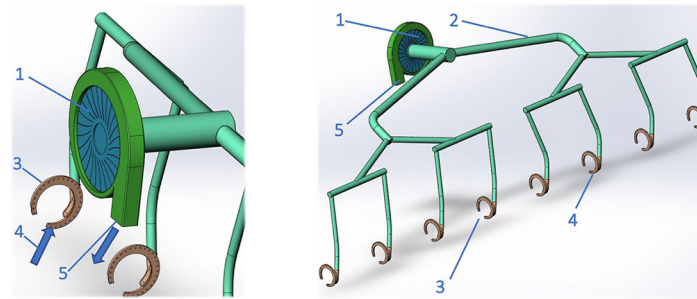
Design diagram of the pneumatic system of a precision seed drill with a centrifugal radial fan: 1 – fan; 2 – tree of pneumatic channels; 3 – seeding machines (air intake area); 4 and 5 – inlet device and outlet section of the fan
